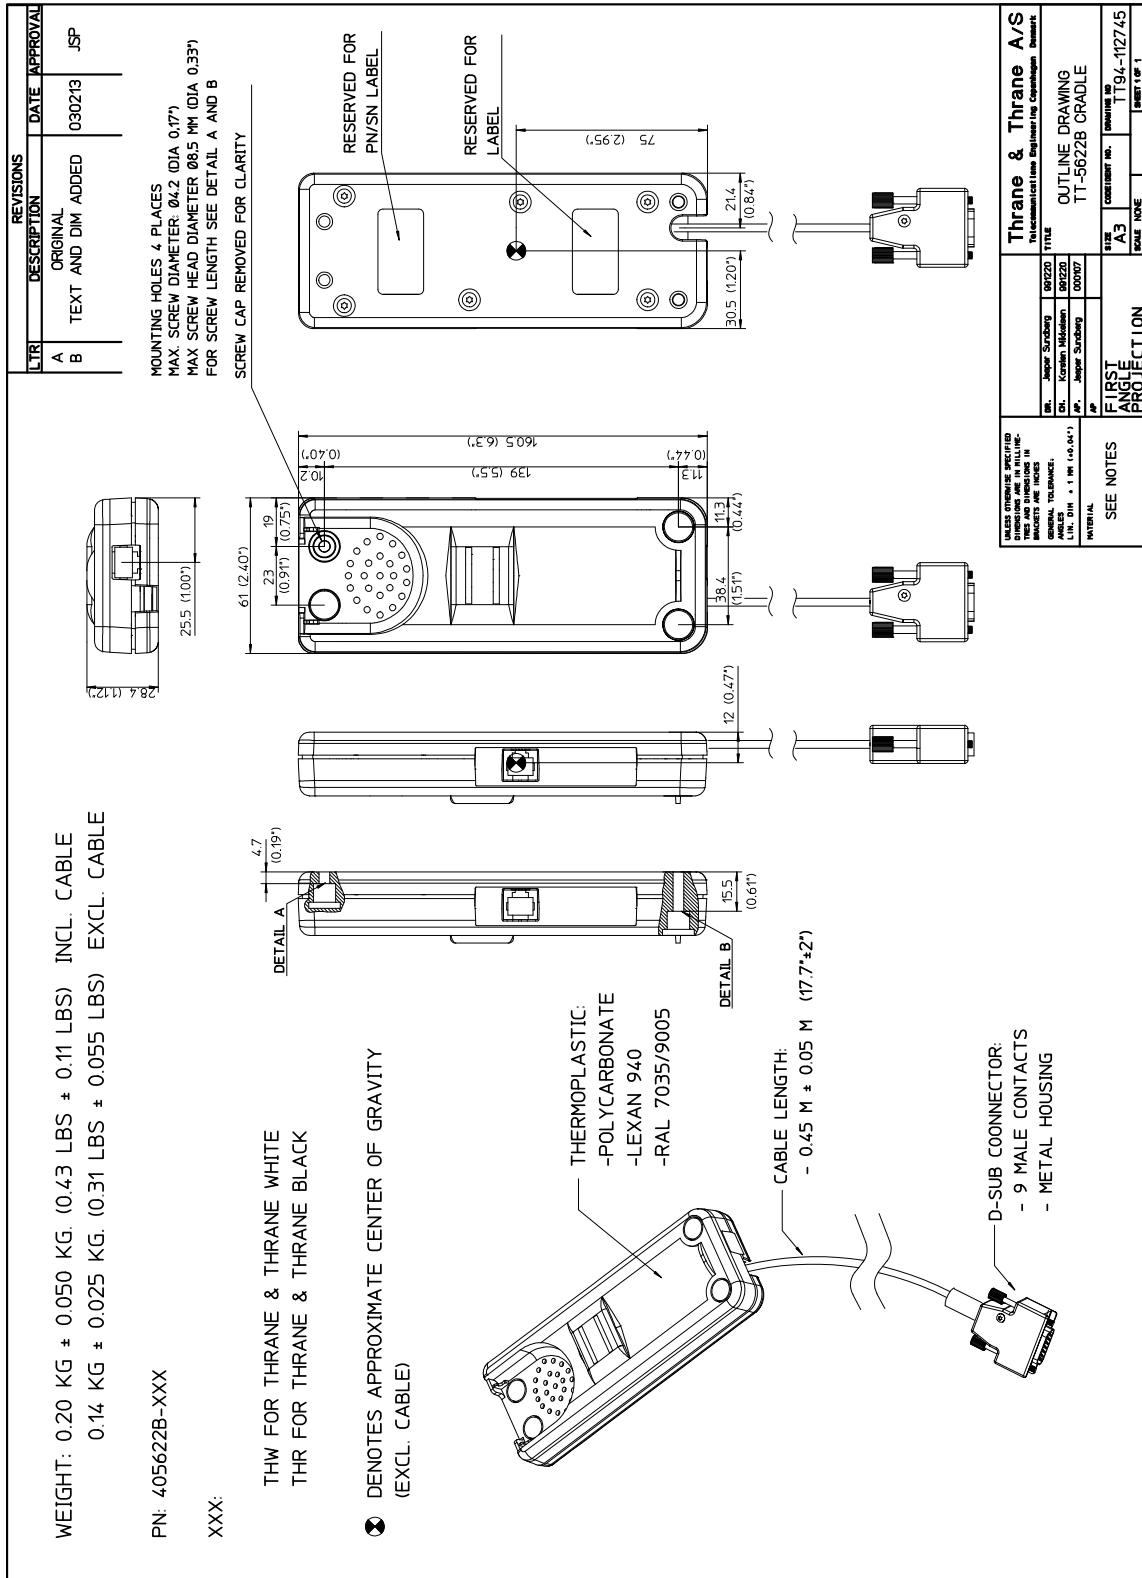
Outline drawing: TT-5622B 2-Wire Cradle
